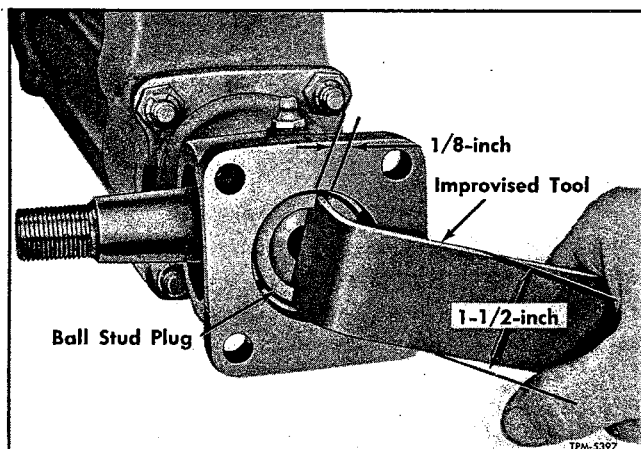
Removing Ball Stud Plug Using Improvised Tool
